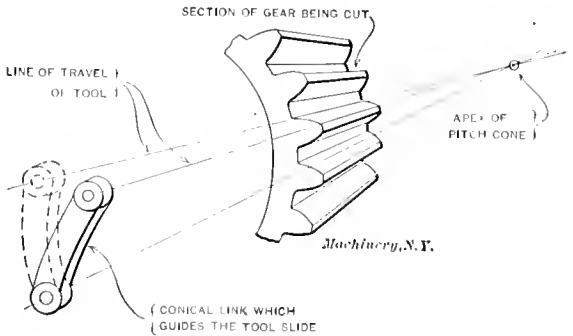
Diagram illustrating the Odontographic Principle for Forming the Teeth of Bevel Gears.
